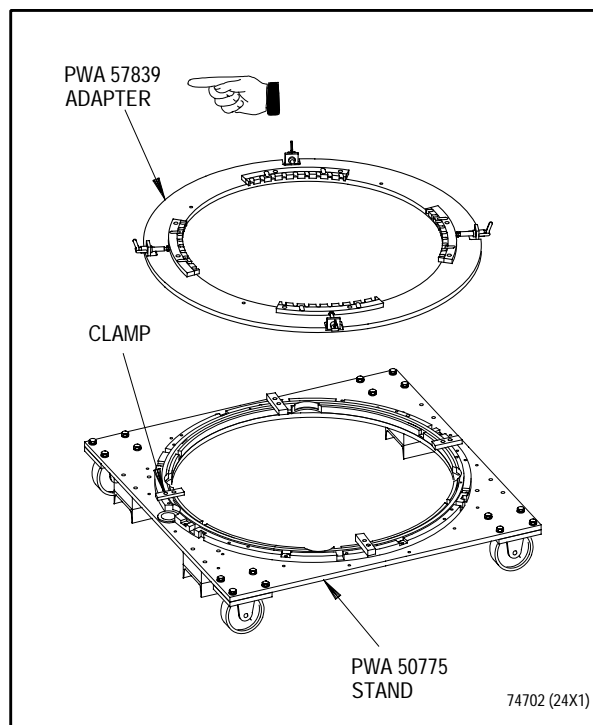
Front Compressor Drive Turbine Rotor and Stator - Installation into PWA 56338 Stand (Sheet 7 of 9)
